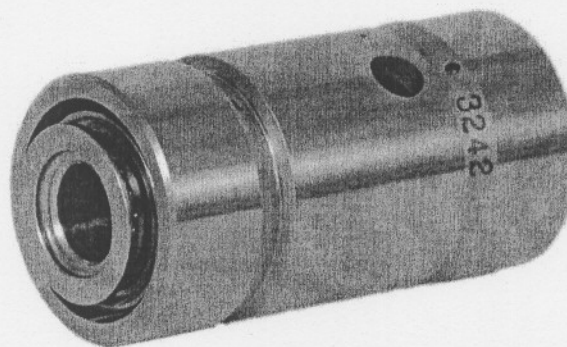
Typical turbocharger ball bearing (Garrett, 2005)
